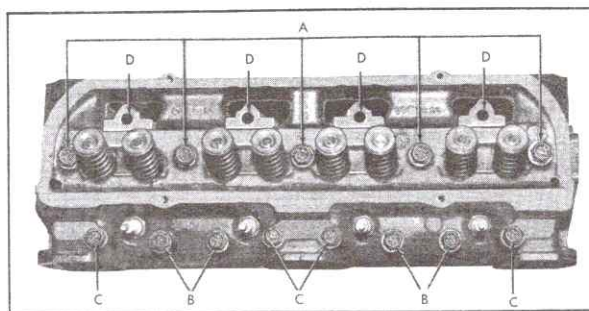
Cylinder Head Cap Screw Location & Length
